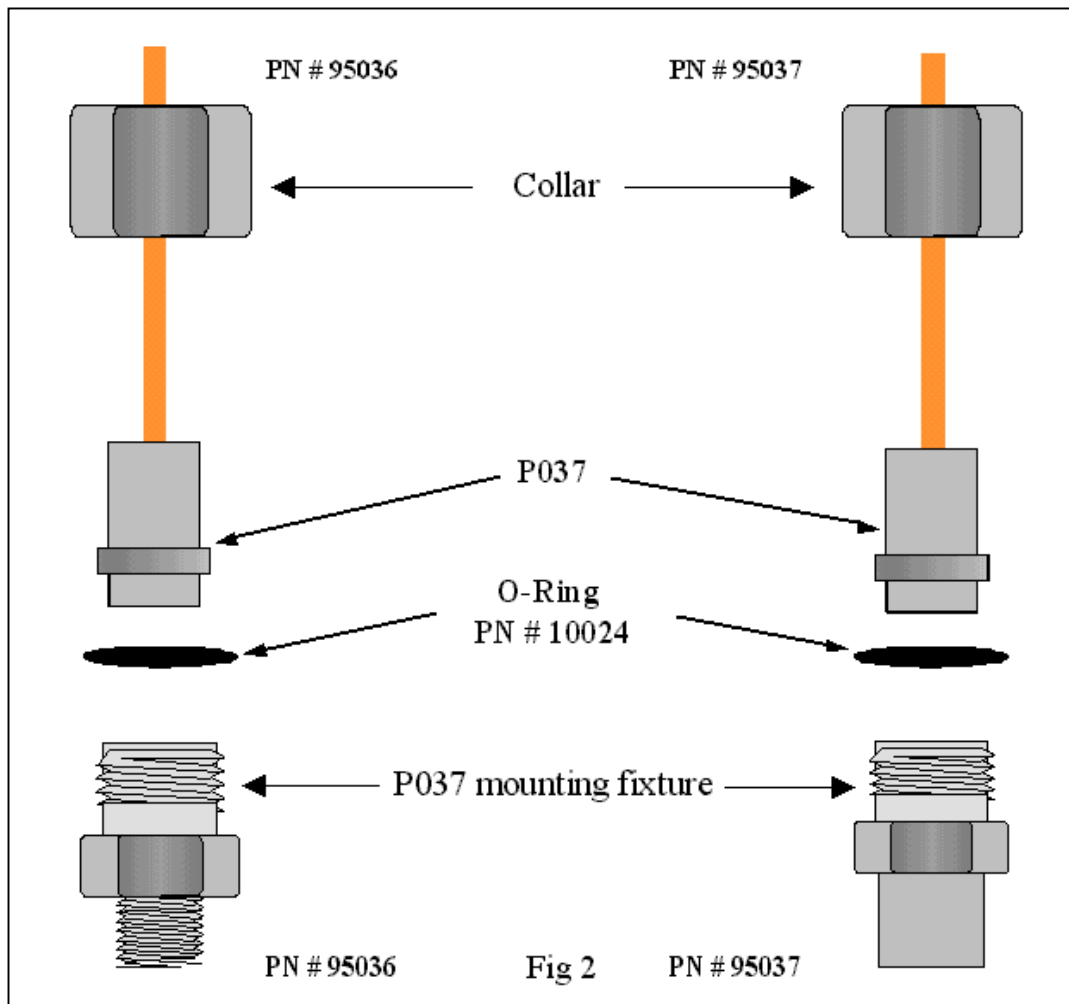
Mounting fixtures: # 95036 - 1/4-18 NPT male process connection, # 95037 – weldable tube stub Torque rating: Collar to fixture is 20 in lbs.
